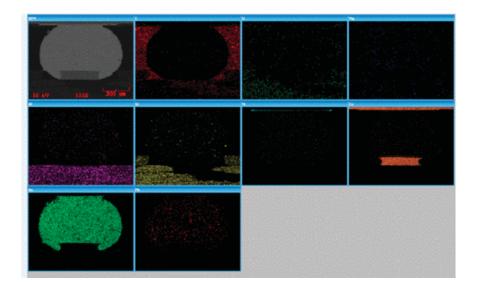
X-ray elemental mapping of FCBGA1704 for a solder ball at the package/board level.
